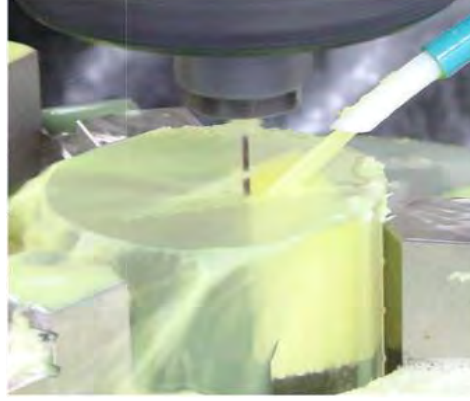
CNC mill drilling a primary MPOF preform. Courtesy of [40].
